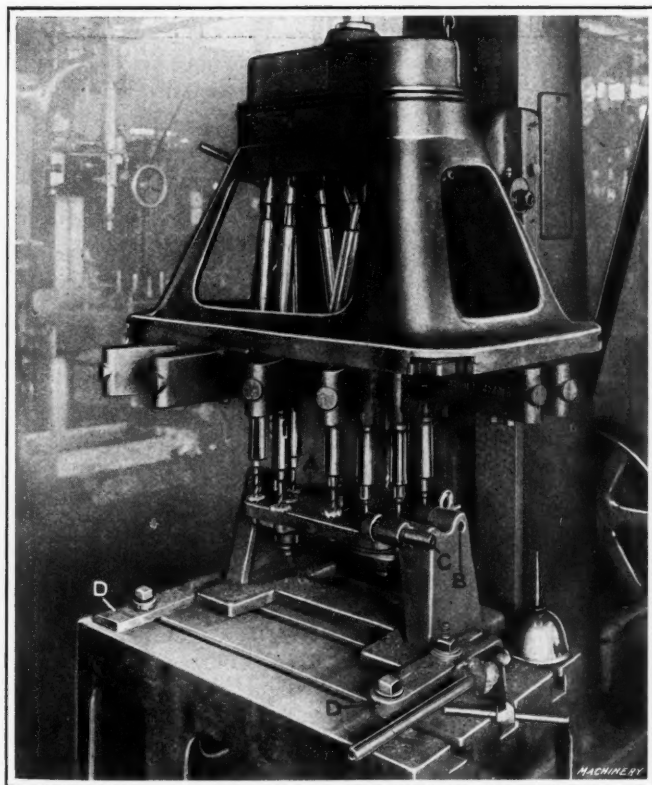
Baush Multiple-spindle Drill equipped for drilling Ten Holes in Flange of Timing Gear-cases—Note Means for turning over Jig Plate and sliding Entire Fixture out from under Spindles for loading
